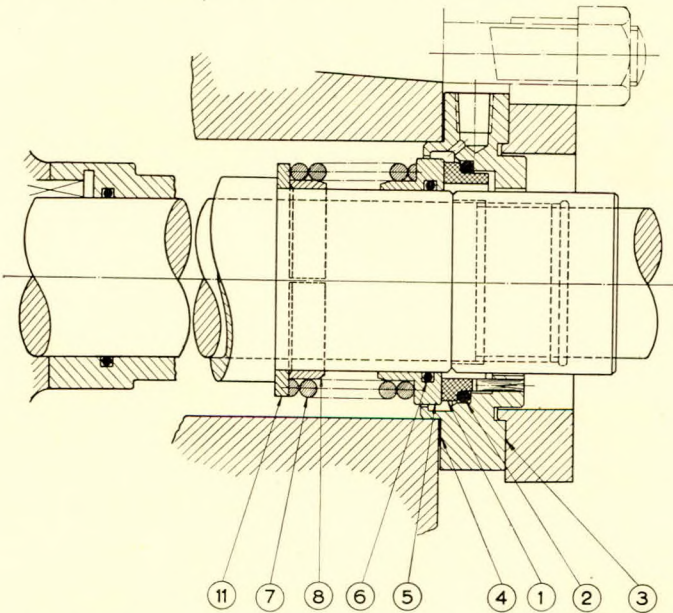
Diagrammatic drawing of Flexibox mechanical seal, type RC, for fitting to shafts of rotary pumps
